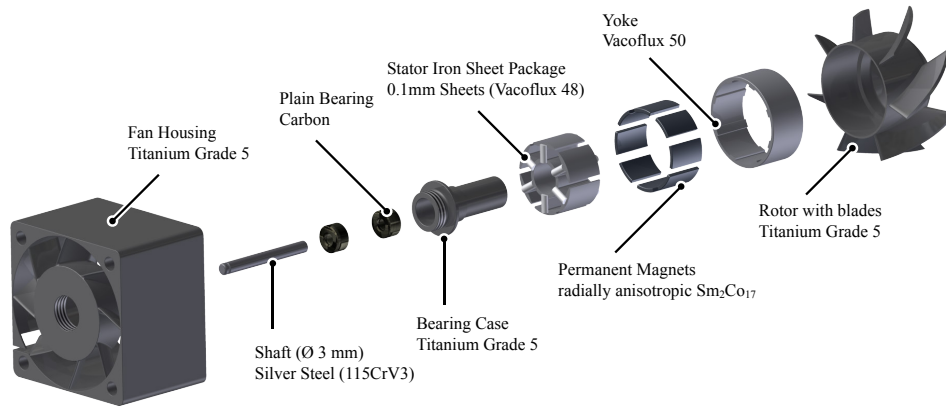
Exploded view drawing of high-temperature (250 °C / 500 °F) 19'000 rpm BLDC fan for forced air-cooling of advanced automotive power electronics.
